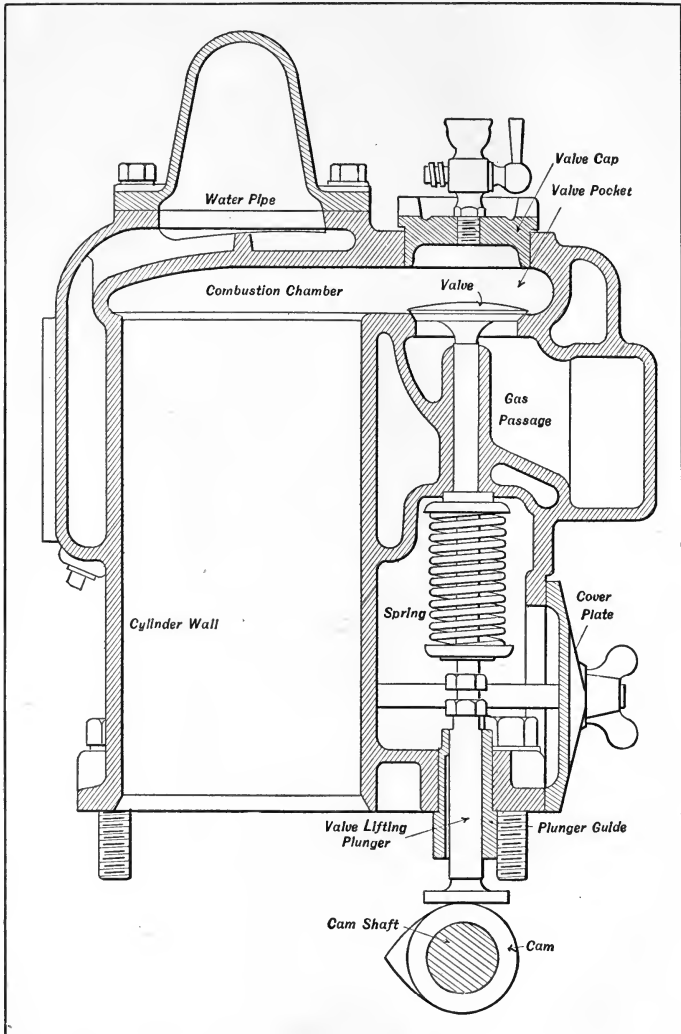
Section Through Cylinder of Hudson Car. A Typical Form Having L-shaped Cylinder with Inlet and Exhaust Valves on Same Side of Cylinder and Actuated from Common Cam Shaft. Note Plate Used to Enclose Valve Springs.
